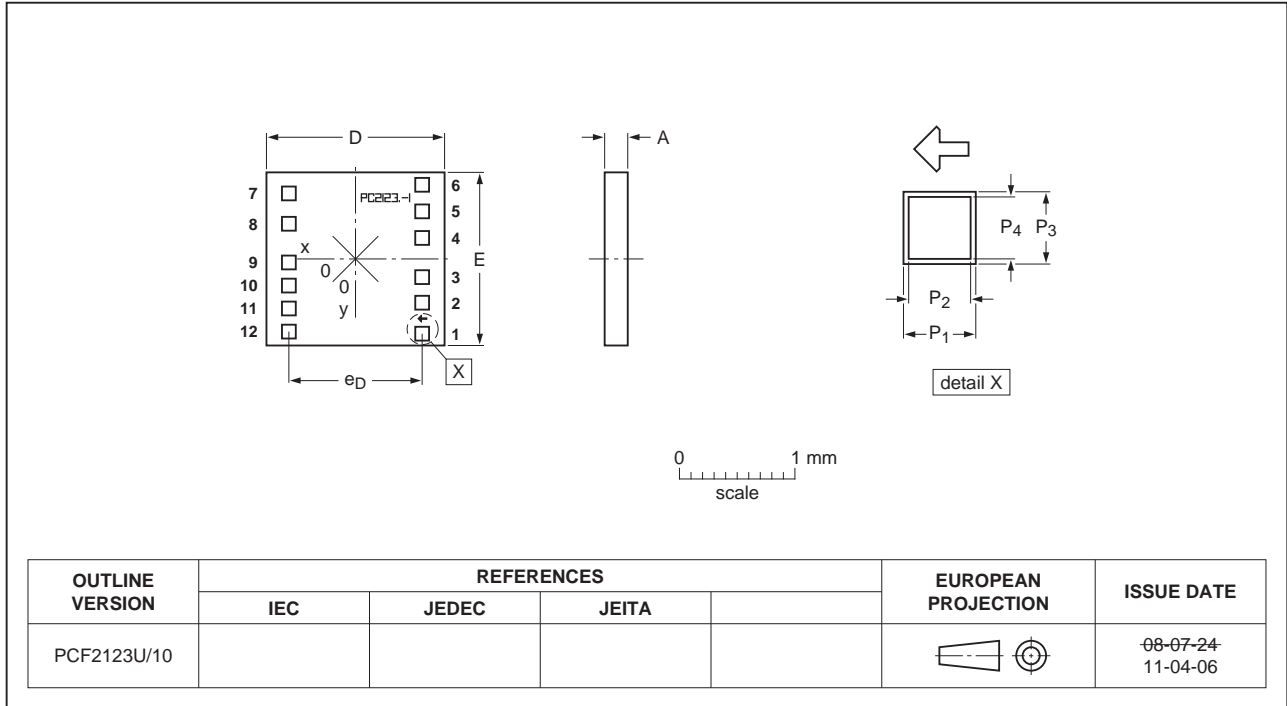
Bare die outline PCF2123U/10 of PCF2123U/5GA/1 and PCF2123U/10AA/1 (for dimensions see Table 47)
